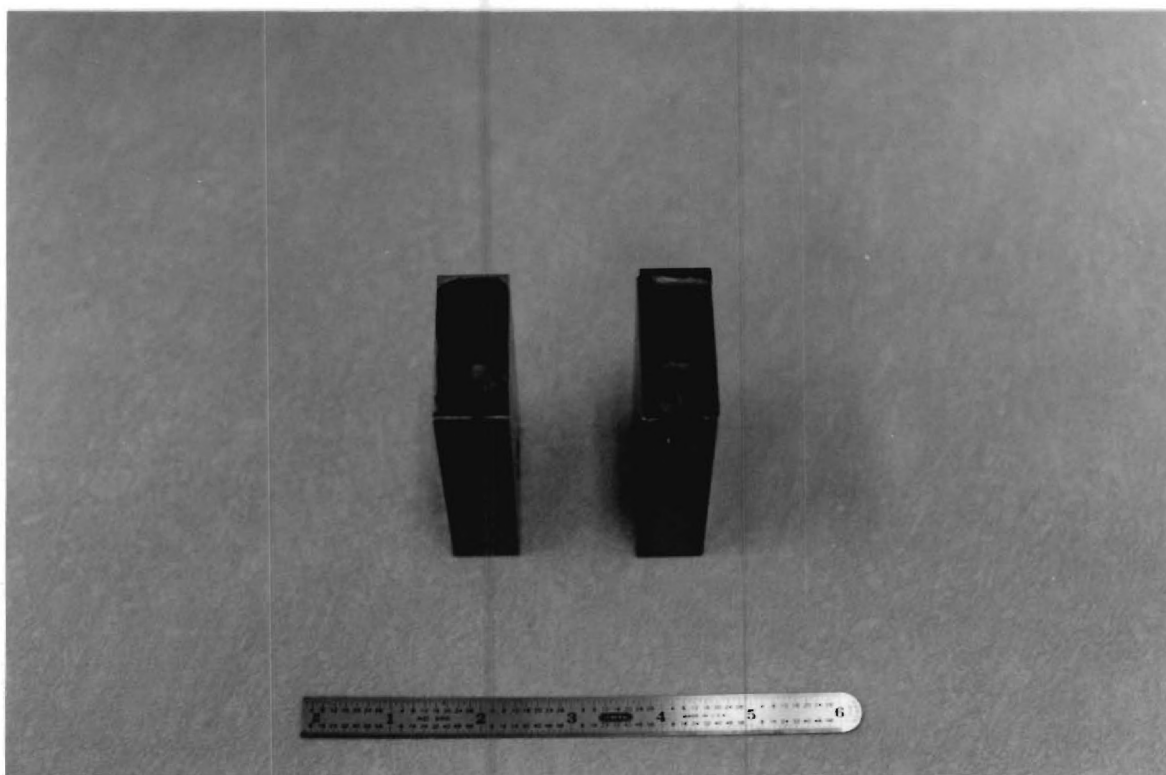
The ferrite failed under loading; no structural adhesive failure occurred. (specimen RBCF2)
